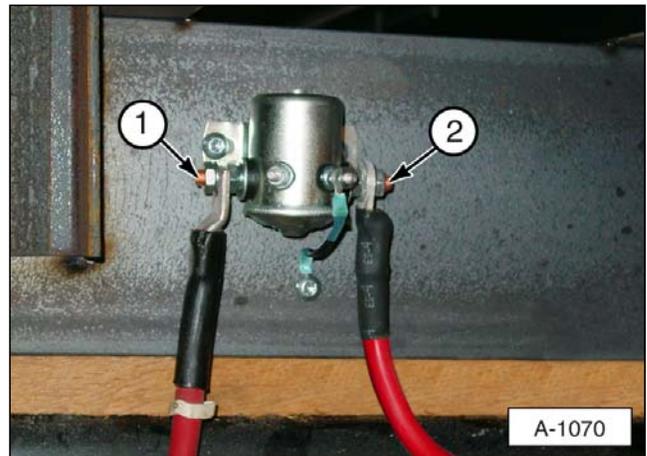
Cut-off solenoid installed between battery and fuse assembly. (1) Short cable, part of solenoid kit. (2) Short end of power cable leading to fuse.
